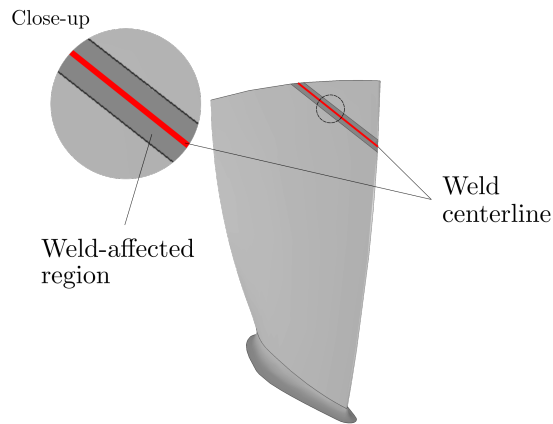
Weld-affected region (dark gray) around the weld centerline (red).
